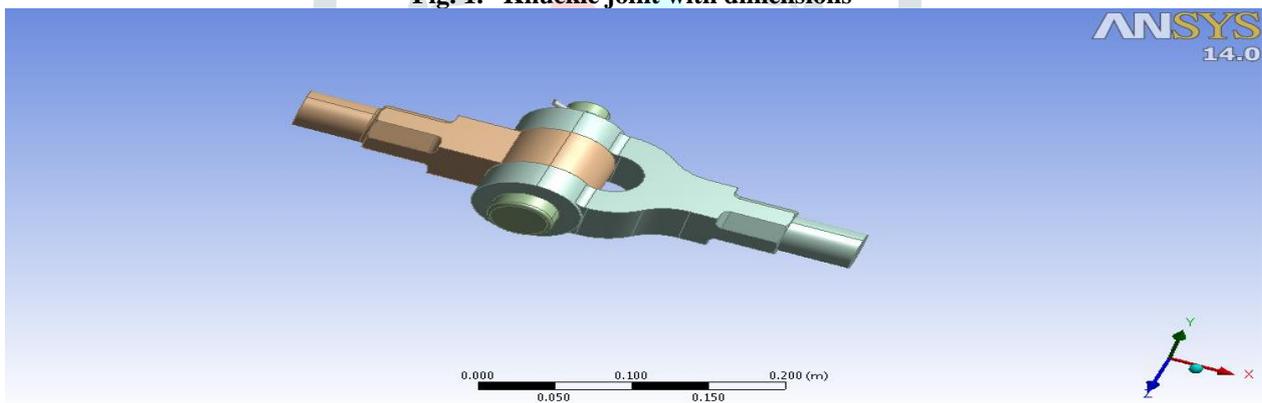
CATIA V5 R20 assembled model of original knuckle joint
